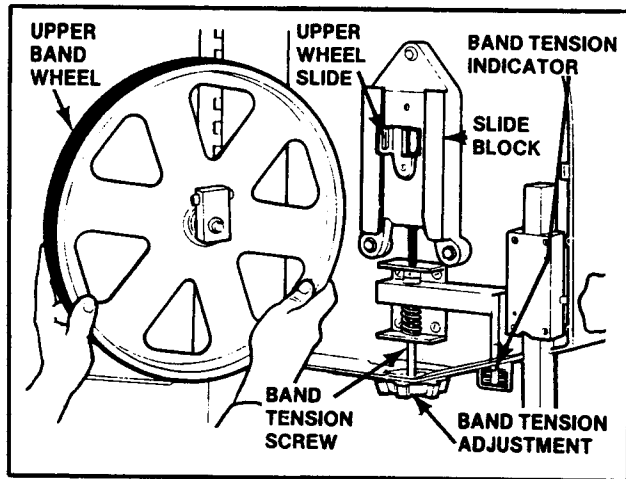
UPPER WHEEL REMOVED TO SHOW HEAD ASSEMBLY DETAIL - FRONT VIEW.
